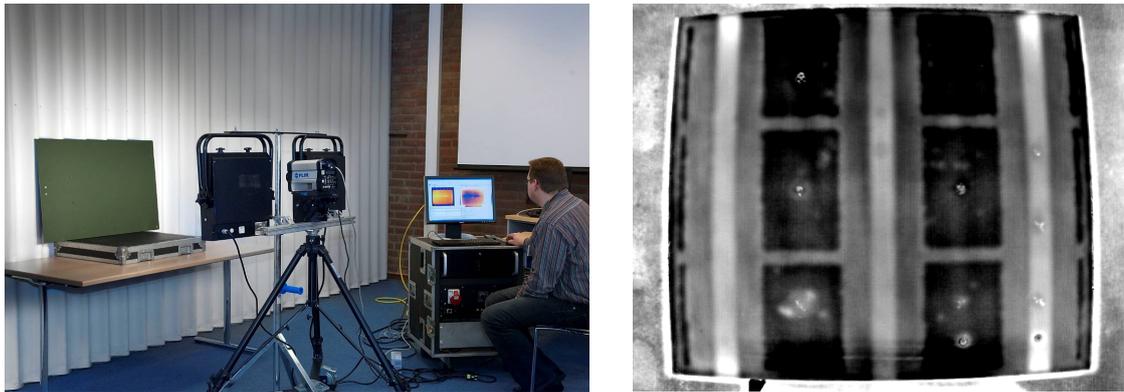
Thermography inspection set-up (left) and result with Lockin technique for panel NTP-D (right, chamfered sandwich structure with 3 L-shaped stiffeners)
